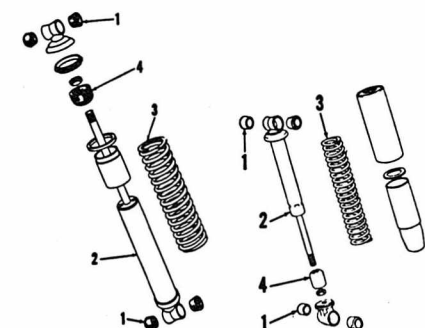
Exploded view of the two types of rear suspension units used.
